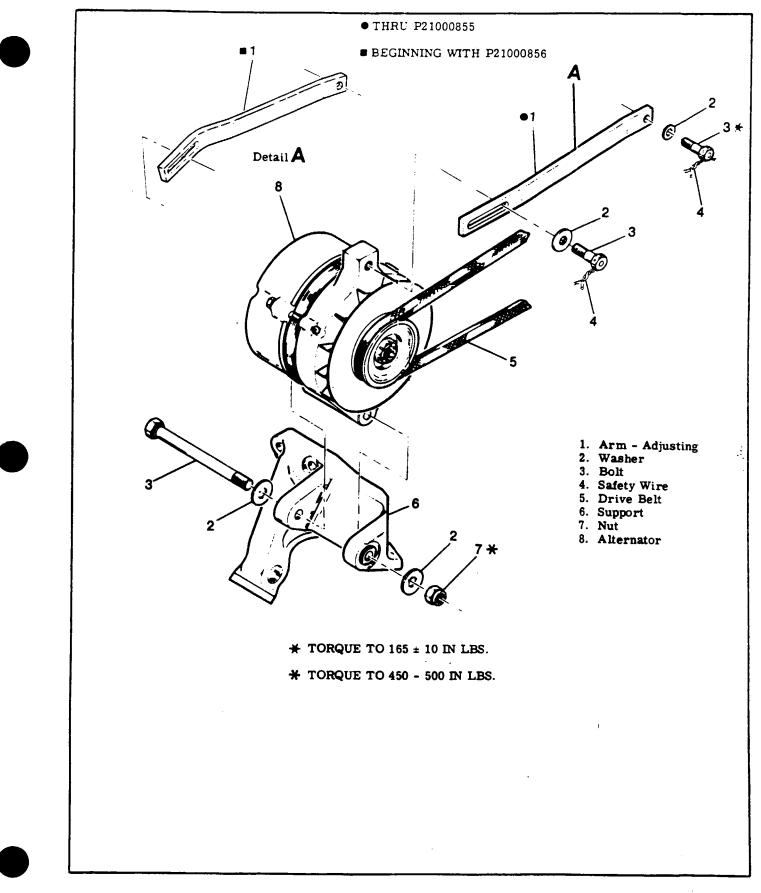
Alternator Installation (Sheet 1 of 2)
